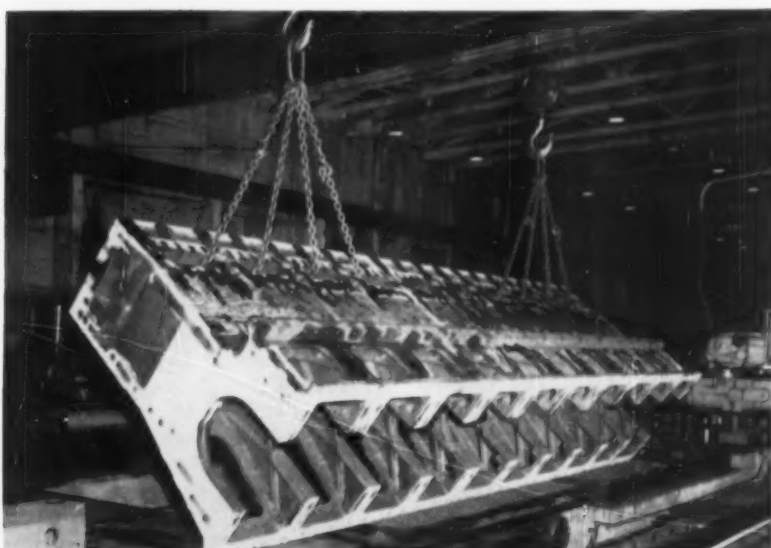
Each 4-chain assembly has two grab hooks for balance, control, and easy adjustment in turning the diesel engine block.
